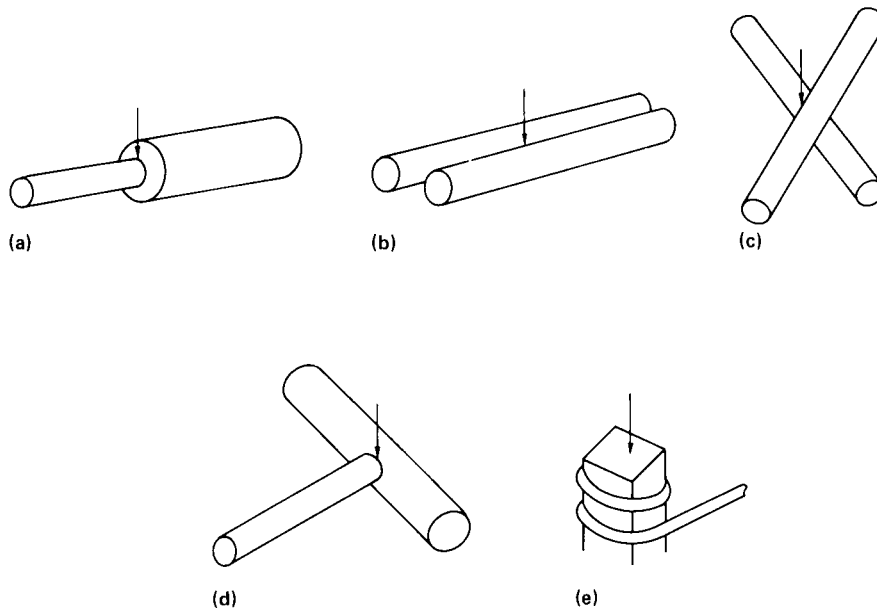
Joint designs for laser beam welds on wire. Arrows show direction of laser beam. (a) Butt weld. (b) Round-to-round lap weld. (c) Cross-joint weld. (d) Spot weld for T-joint. (e) Terminal or lug weld
